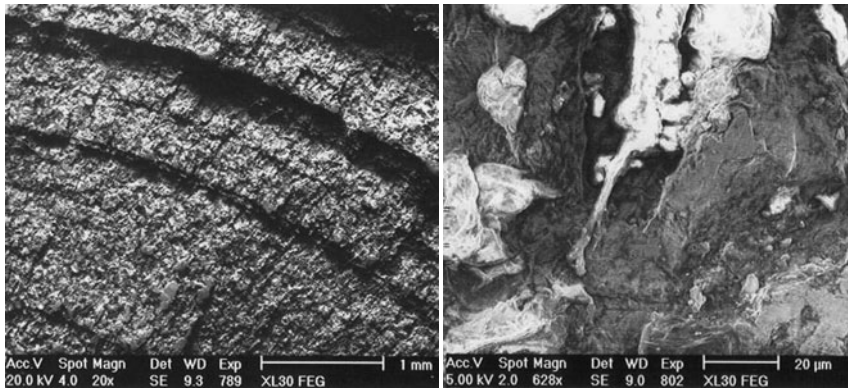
Left*: one striation represents a progress of the crack by one step (bar = 1 mm); *Right*: the fast fractured surface (bar = 20 μm). The surface at this stage is normally rough but was smoothed by wear after the fracture occurred
